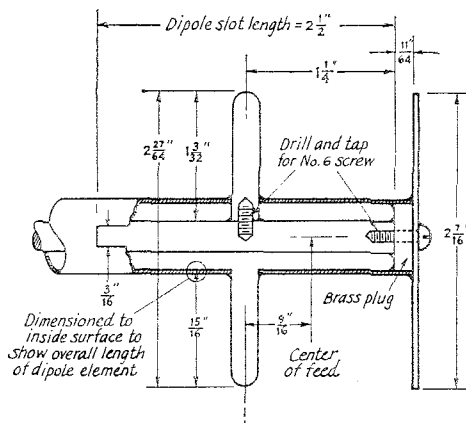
Dimension drawing of the dipole and reflector assembly. Rigid coaxial line, left, extends to the parabolic dish reflector, and is terminated in a coaxial fitting in back of the dish. Inner conductor and dipole are $\frac{1}{4}$ -inch diameter.
